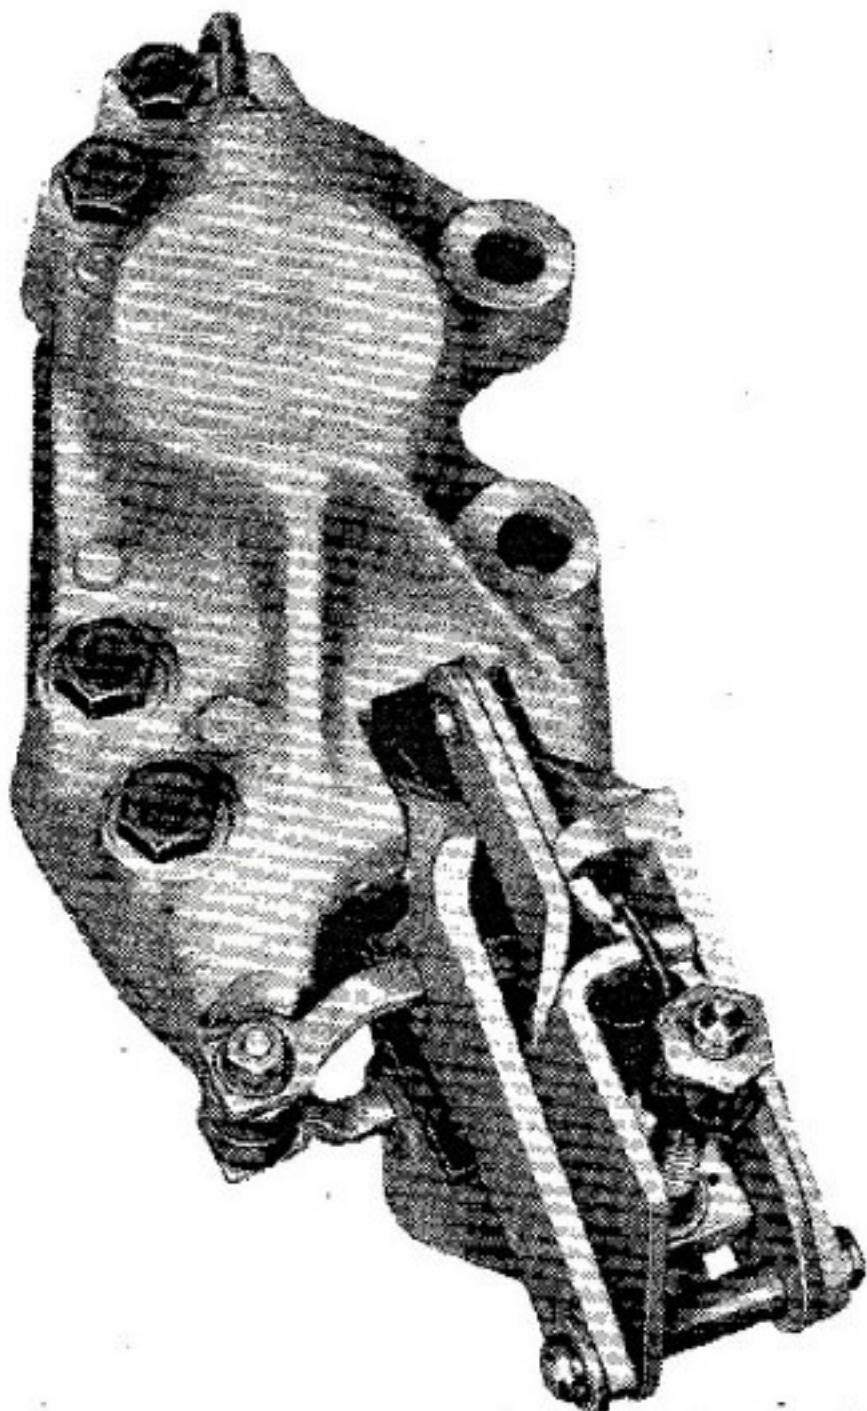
Rear caliper assembly with hand brake mechanism.
